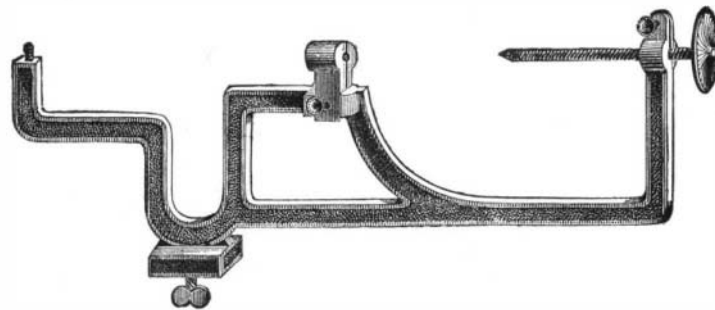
BRACKET FOR HOLDING THE HAND DRILL.
